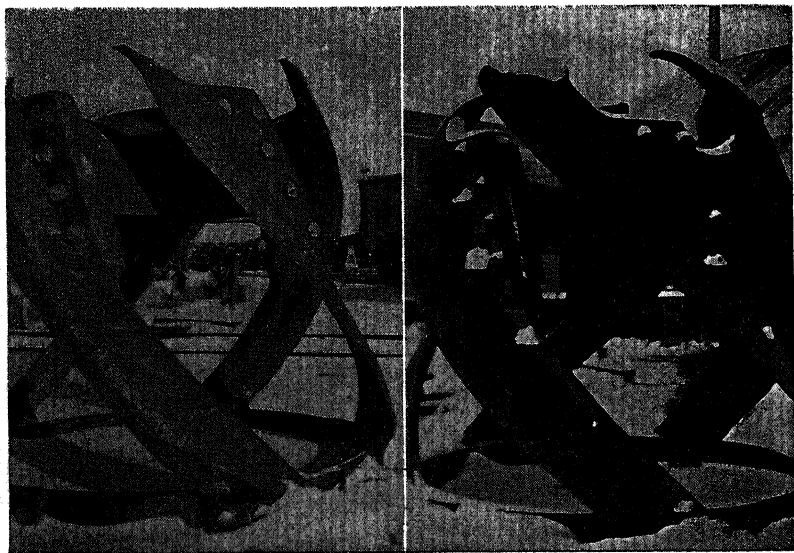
Dredge cutter head. Left: Worn head. Right: Head after blades were refaced with abrasion resisting electrode. Saved \$720.00 over replacement. Hard-faced blades last 33% longer than new ones.
